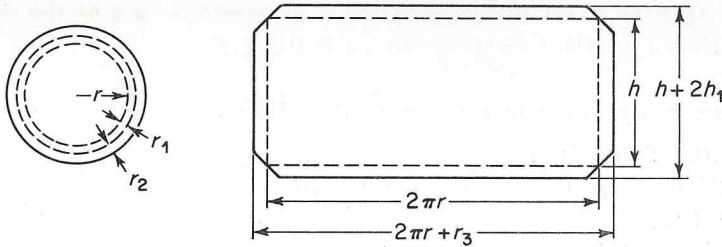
The geometry of parts of a right circular cylindrical sheet metal can.
